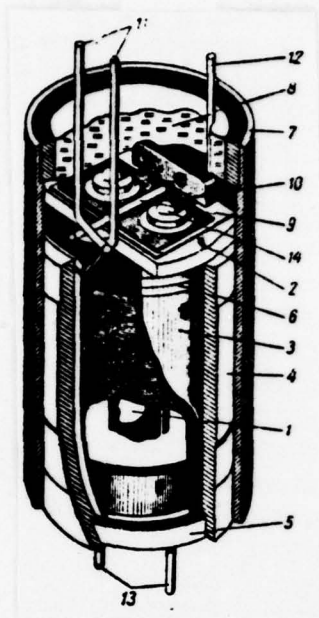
Relays of type 11PCR. 1 - core; 2 - armature; 3 - coil; 4 - steel cylinder (magnetic circuit); 5 - steel base; 6 - sealing brass jaw; 7 - external brass jacket; 8 - glass insulator; 9 - slide contact; 10 - suspension spring of armature; 11 - fixed contacts; 12 - conclusion of slide contact; 13 - coil leads; 14 - rivet for the attachment of insulation of slide contact from armature.
